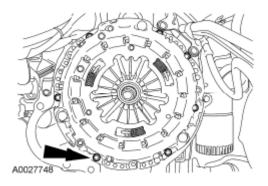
Locating Clutch Pressure Plate And Clutch Disc Bolts Courtesy of FORD MOTOR CO.
